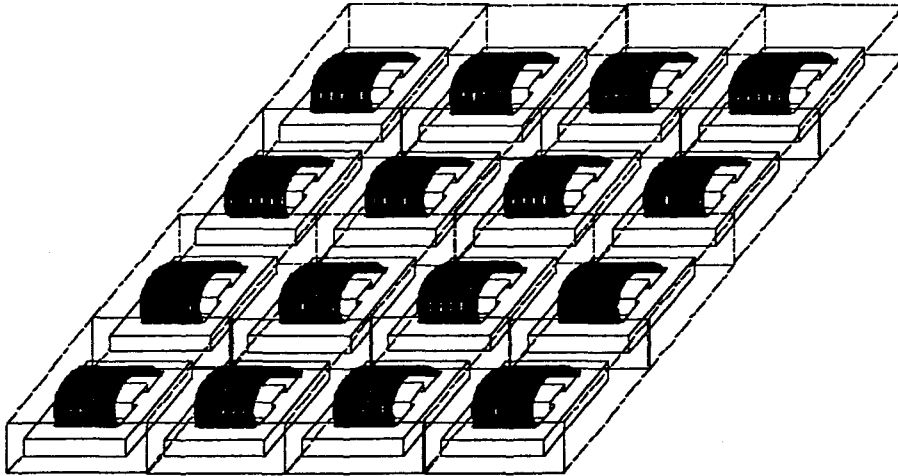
Single layer packing of elements in a multiple core assembly
